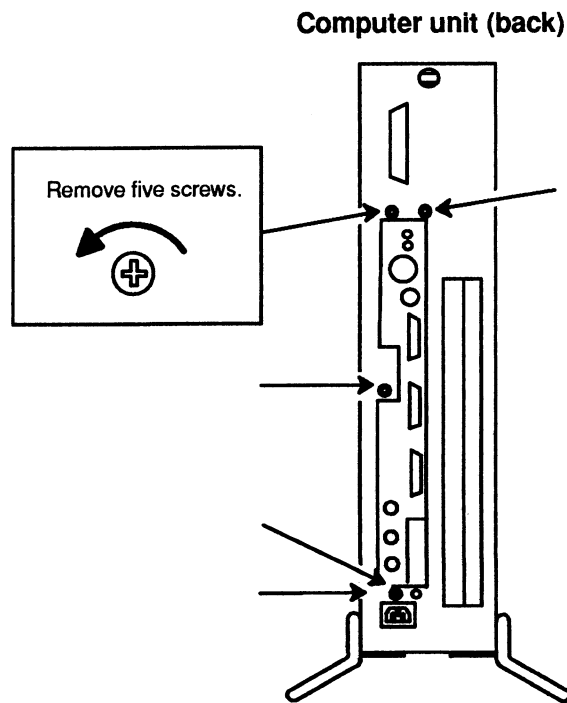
Removing the Screws that Secure the System Board Bracket to the Back of the Computer Unit
